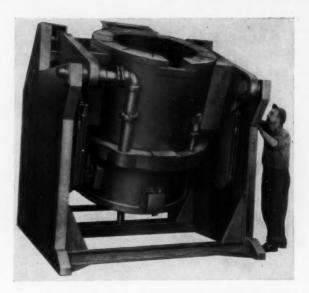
This photograph shows a large motorized lip axis tilting furnace for melting magnesium. Large cast or welded steel crucibles with ears on top are supported by the cast iron flange at the top of this furnace. The flue gases escape through a port in the back and the melting conditions are essentially those of indirect-flame melting.
